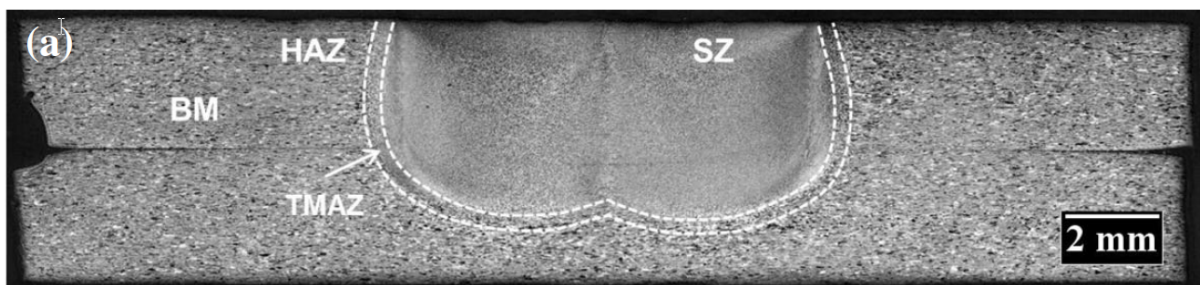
Cross-section and metallurgical zones of a typical refill FSSW weld. [34]
